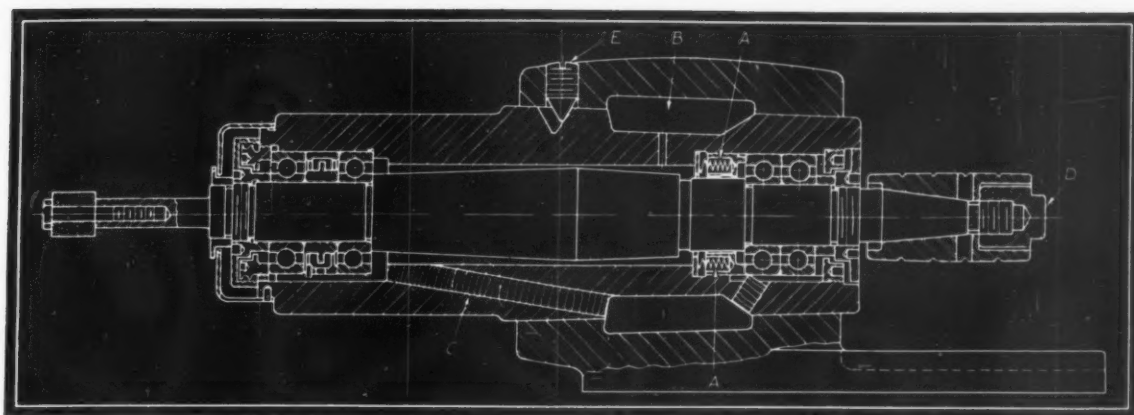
Plain type spindle mounted on bearings selected for concentricity. Rear bearings have creeping fit to allow for expansion and contraction of spindle
